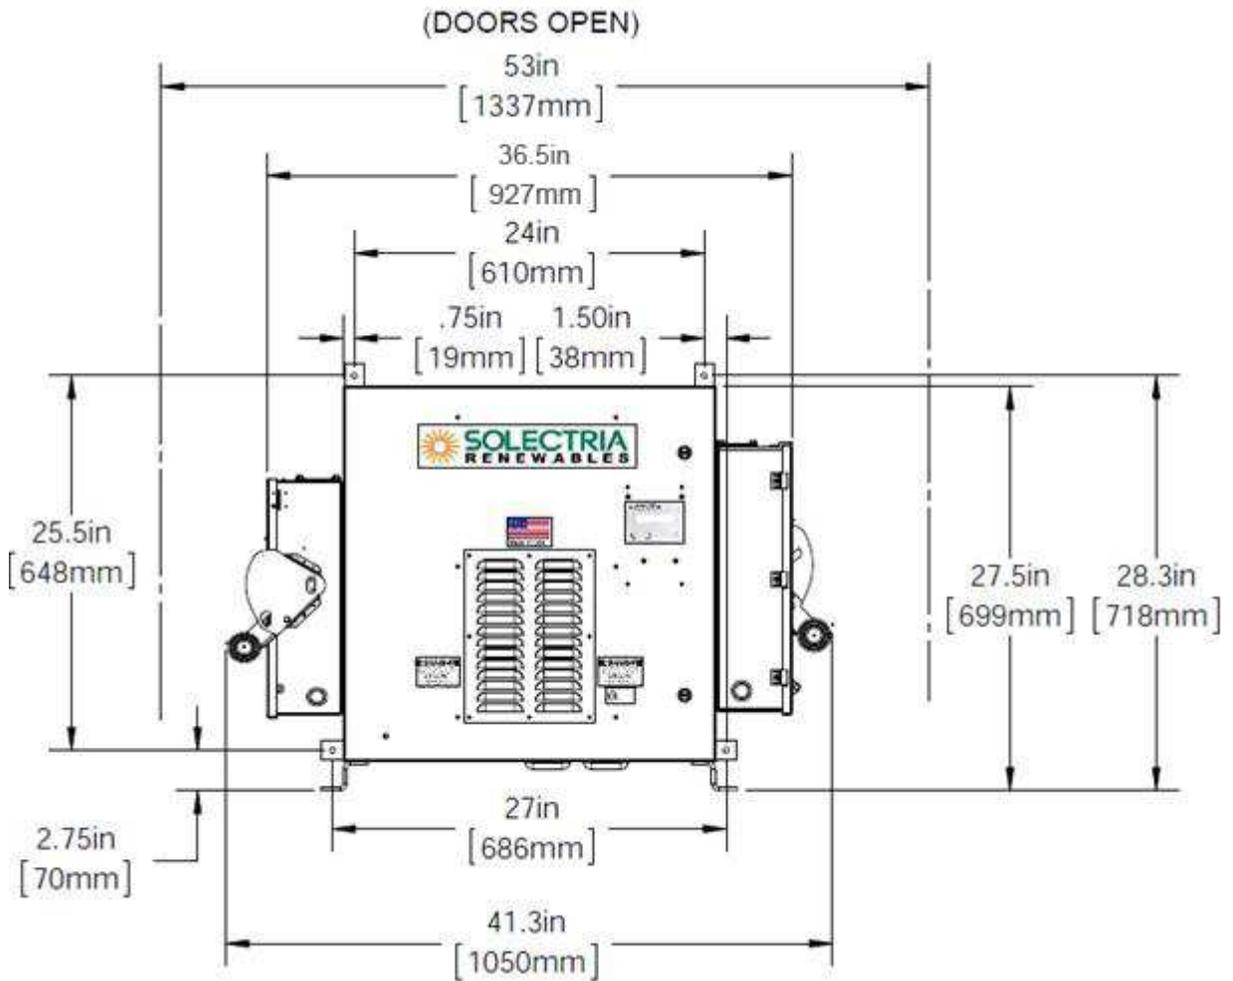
The PVI 10-15KW Inverter Series Dimension (Front View)
